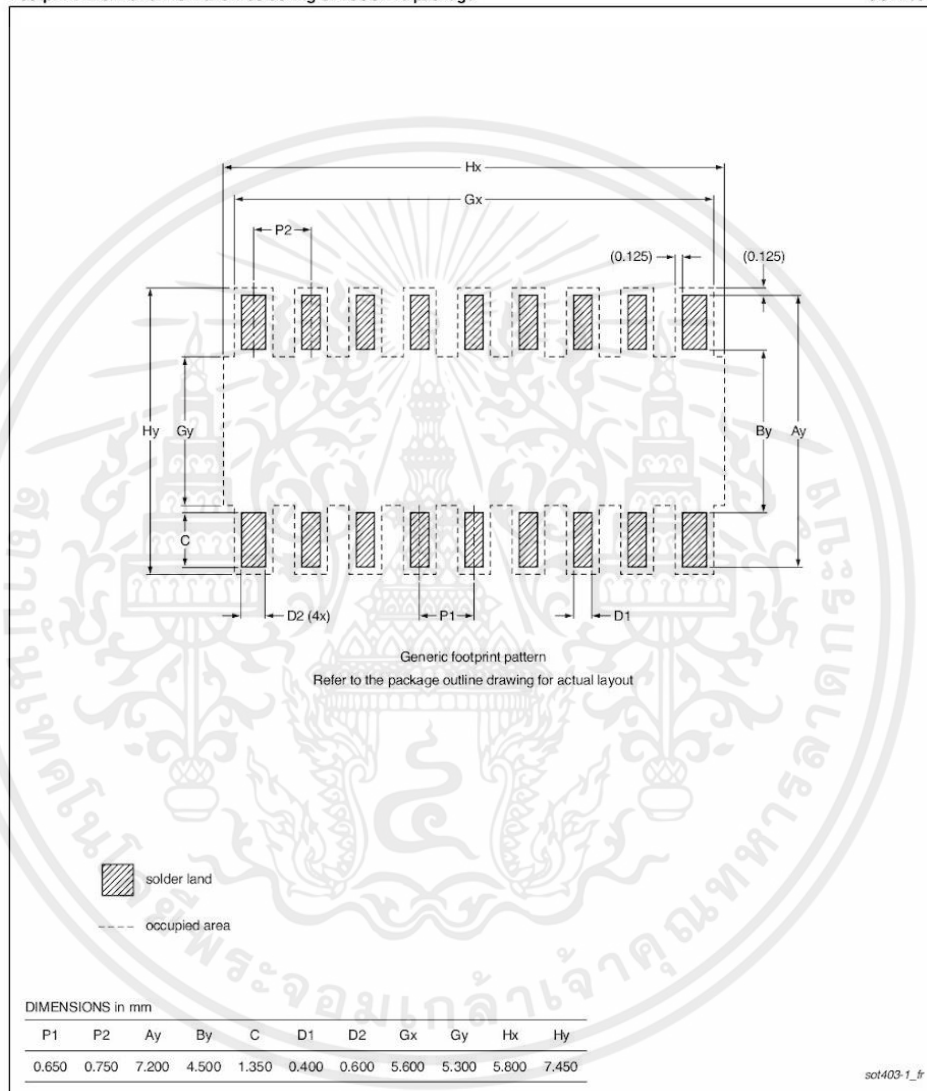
PCB footprint for SOT403-1 (TSSOP16); reflow soldering
